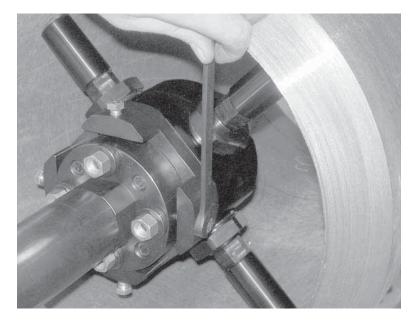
Turn the mandrel centering screws to adjust the position of the mandrel.
